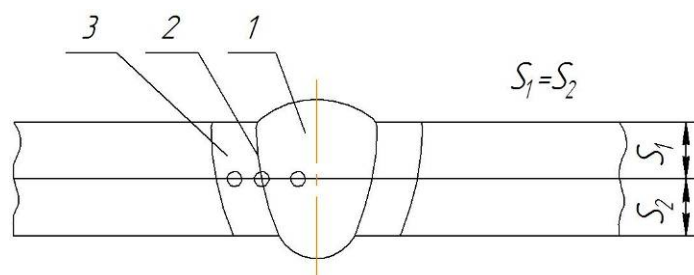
The scheme of electron microradiography: 1 – Weld; 2 – Weld line; 3 – HAZ
